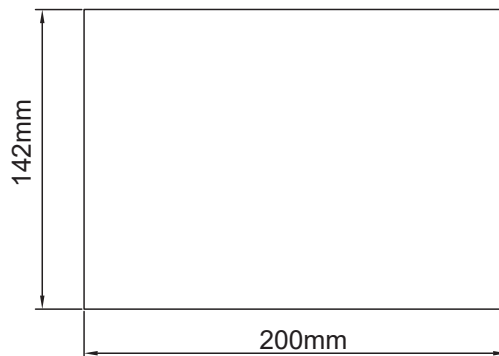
Mounting Hole Dimensions of the LCM )
